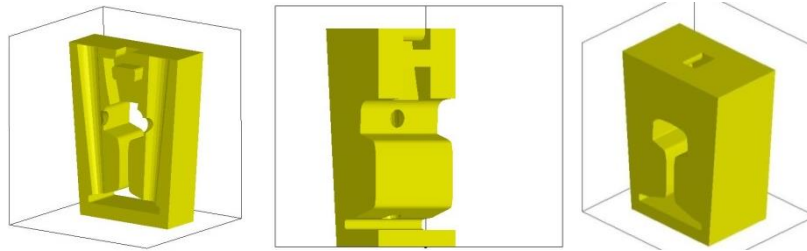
Sand mould used for casting in two cross-sections and as a whole
